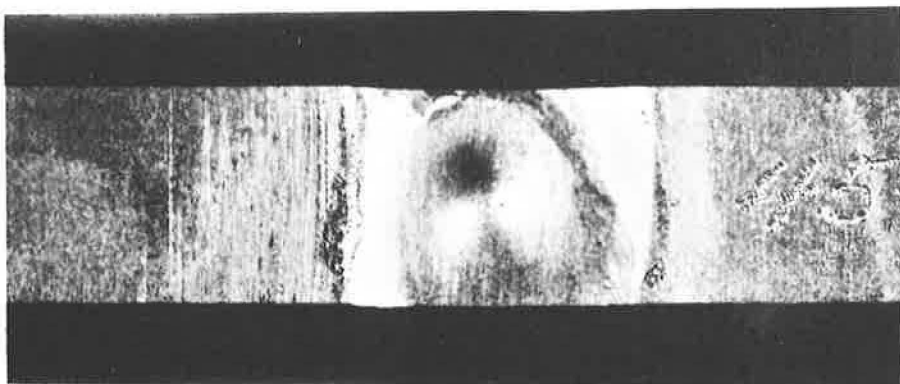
Crater on root pass of TIG butt weld in 2219-T87 plate (S-278457, mag. 2X).
